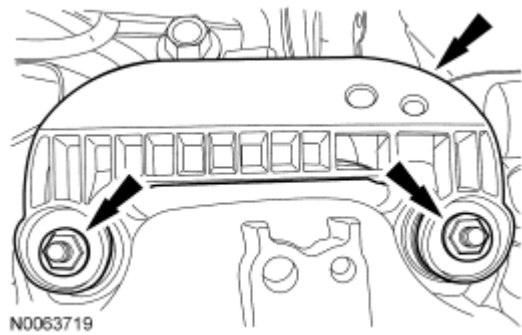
Identifying Wiring Harness Retaining Bracket & Nuts
